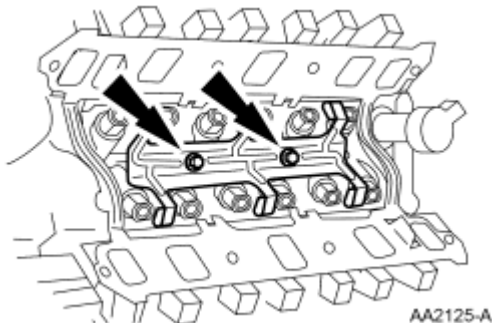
Locating Hydraulic Lash Adjuster Guide Plate Retainer
